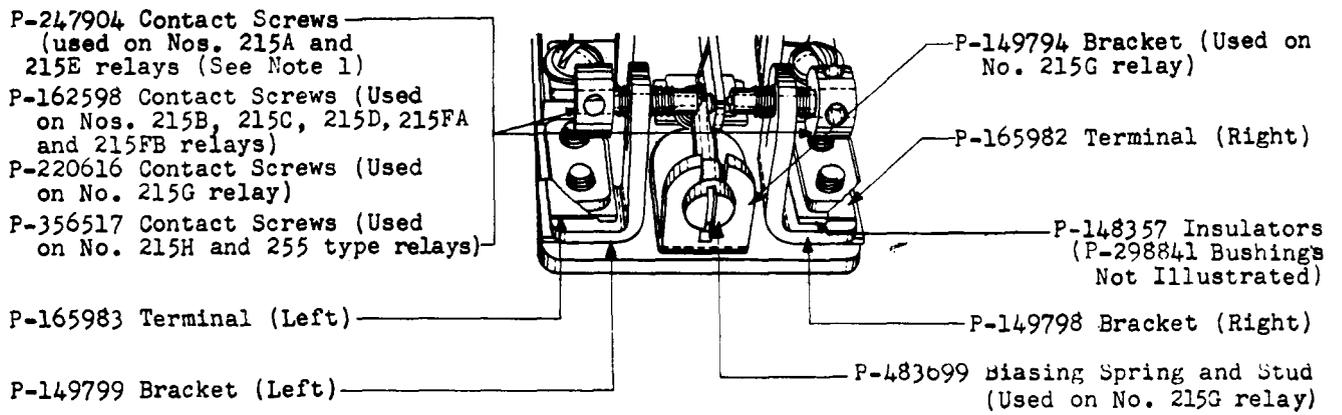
Armature Bracket Assembly (255-type Relays Only)
